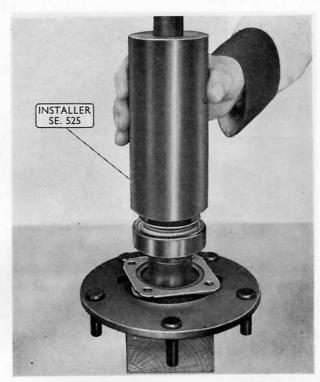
Installer in position on bearing retaining ring. The installer must not be removed until the ring has cooled
